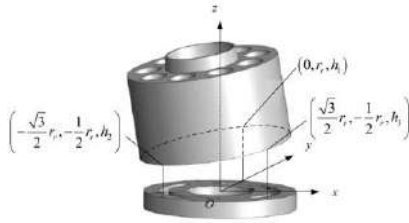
Wedge-shaped oil film between cylinder block and valve plate
